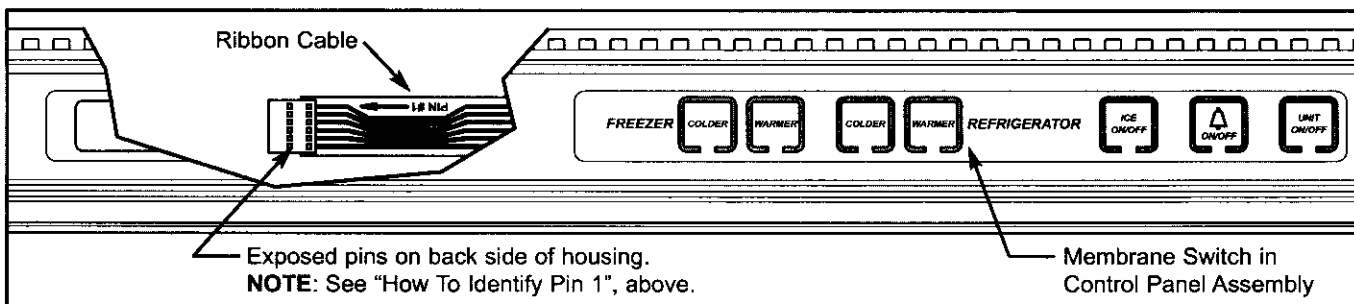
Control Panel Assy with Cut-Away View to Show Ribbon Cable (700TCI-3 Shown)
